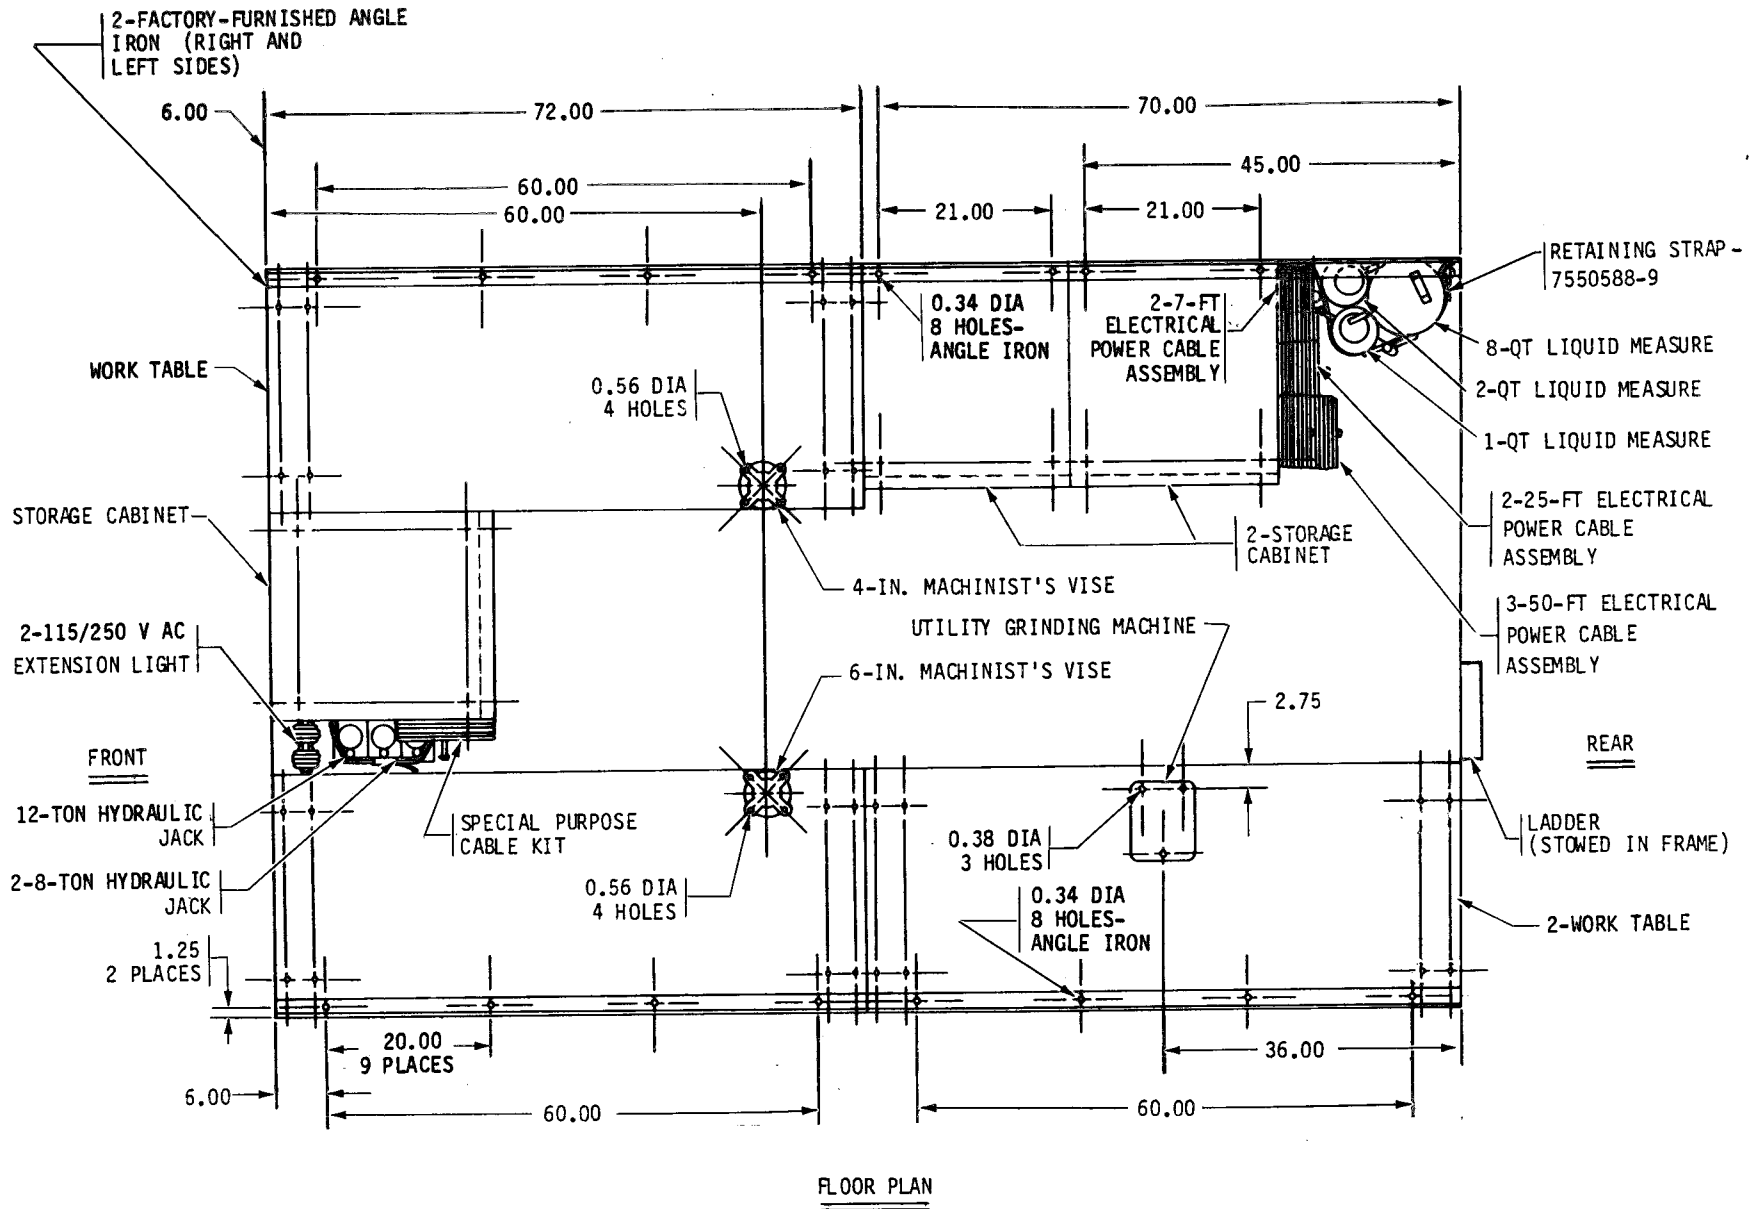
Components to be mounted, floor plan, unit 1, M109A3.
